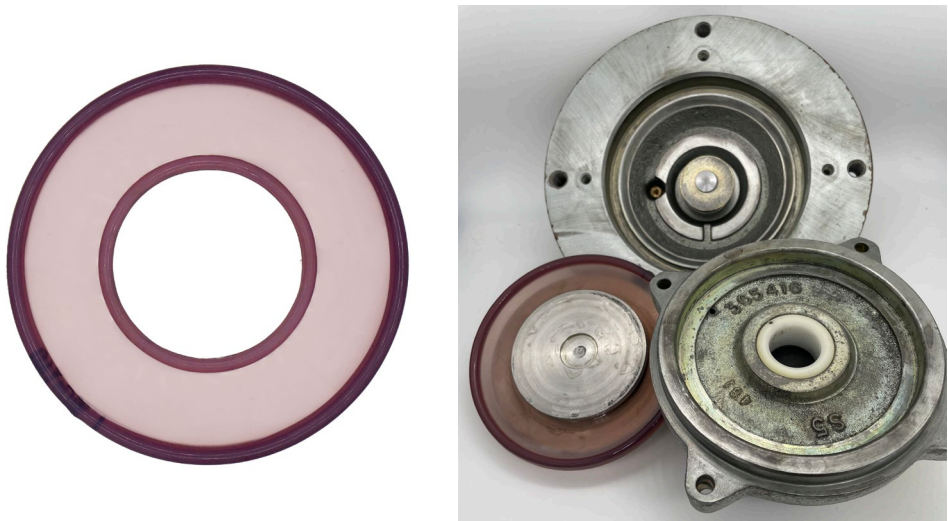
Additive manufactured brake membrane and in-brake valve assembly
